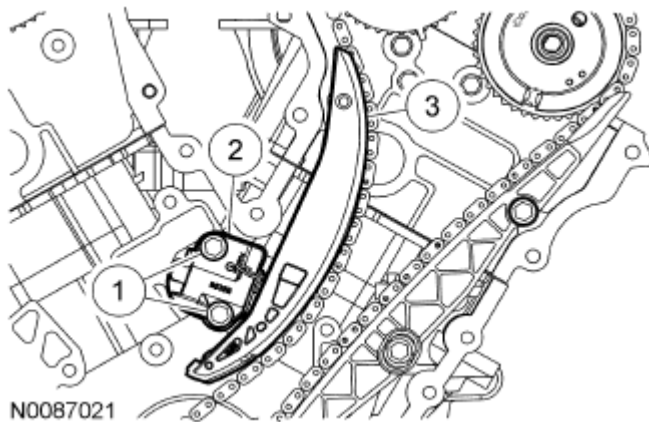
Identifying LH Timing Chain And Tensioner Arm With Bolts
